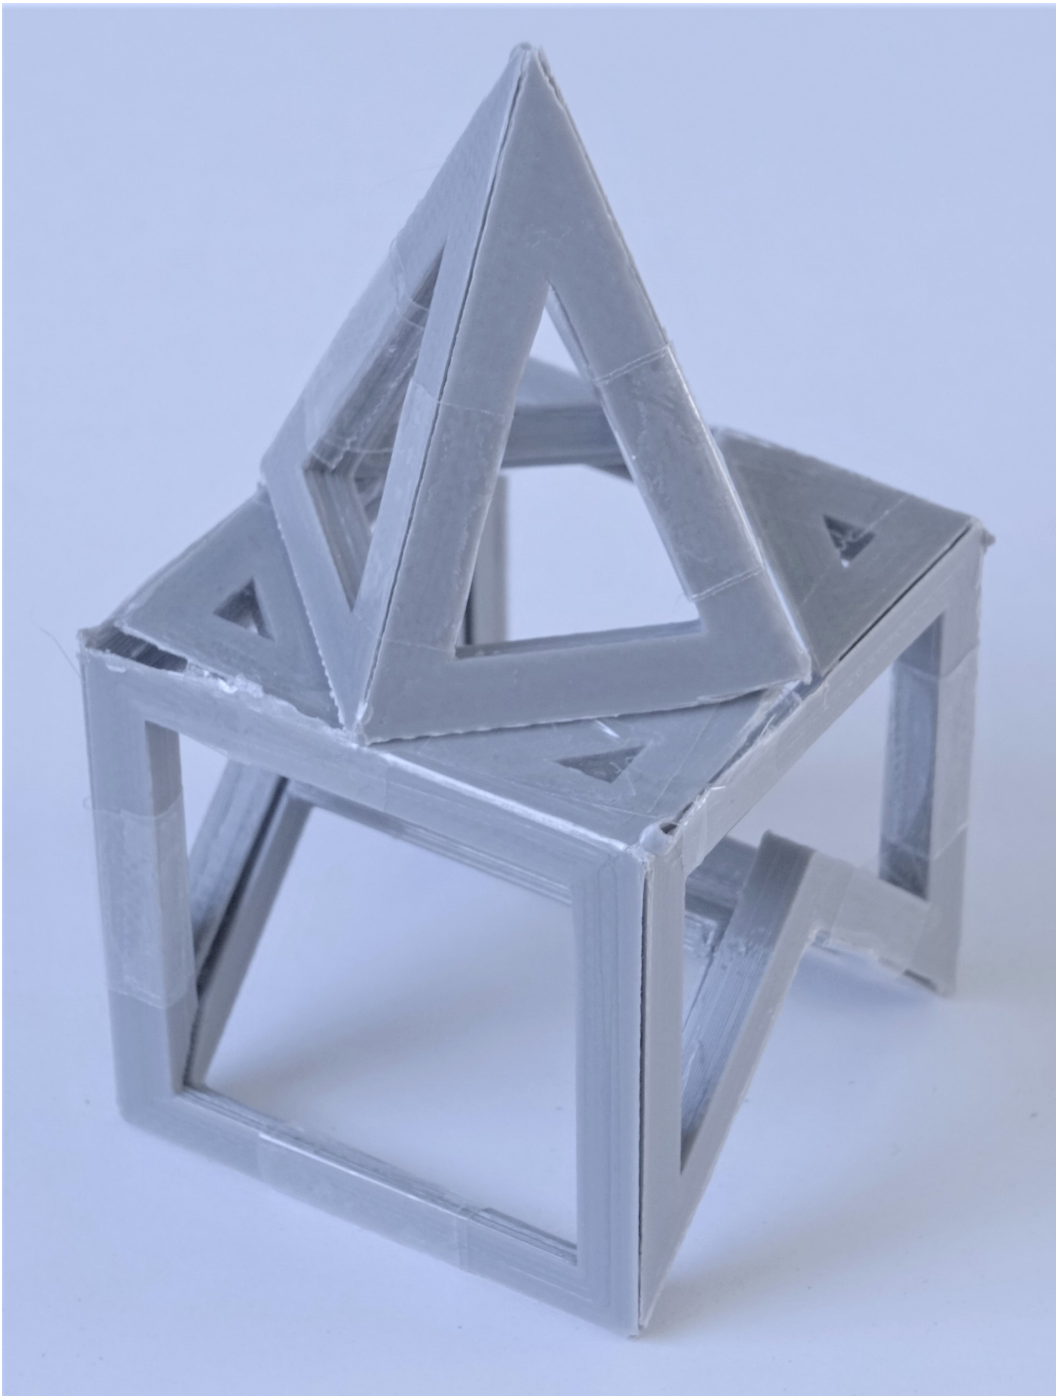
Small low fidelity 3D print in the assembled state. It is 8cm high. It is not assembled optimally because of poor 3D print quality and a missing fabric surface to hold the pieces together. The objects can be assembled correctly, everything fits together.
